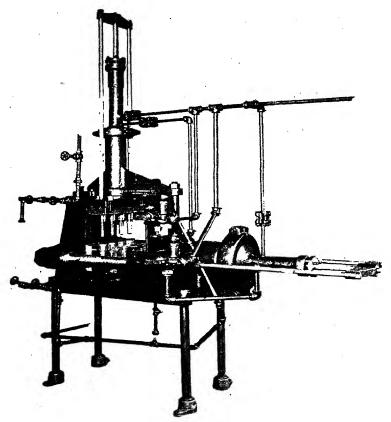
Angle-molding press of rod, or sectional, type. A more common type of construction, regardless of press size.
